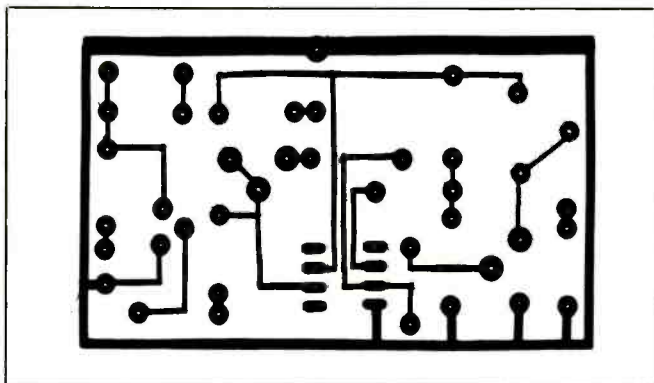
Actual-size etching-and-drilling guide for home fabricating a printed-circuit board.
